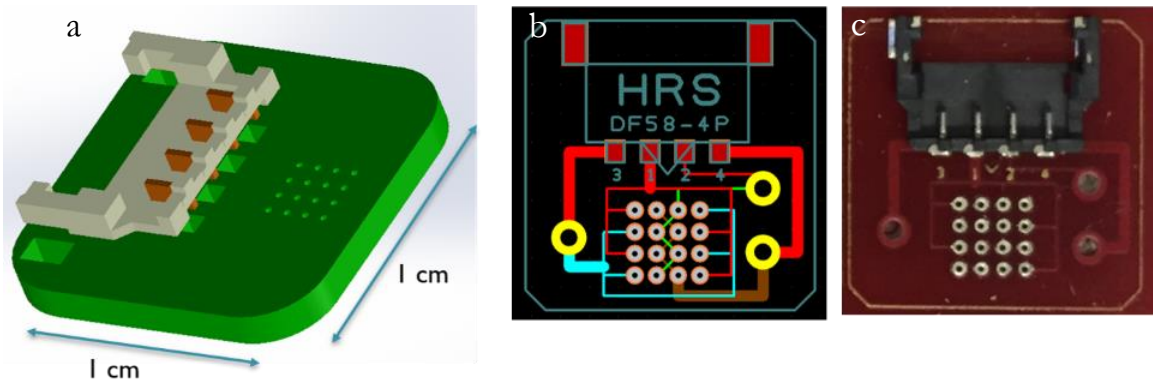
2nd generation EP chip PCB design. It has 4x4 needle holders (200 μm diameter) spaced 0.75 mm apart and 1-unit 4-pin connector (HRS, DF58-4P, 5x5 mm in size) location. (a) The 3D model designed in SolidWorks. (b) The PCB layout design with traces built with PCBArtist software. It has 4 conductive layers and 3 via holes that connect the bottom layers to the top layer of the connector. (c) A picture of 2nd gen. EP chip fabricated by Advanced Circuits, Aurora, CO.
